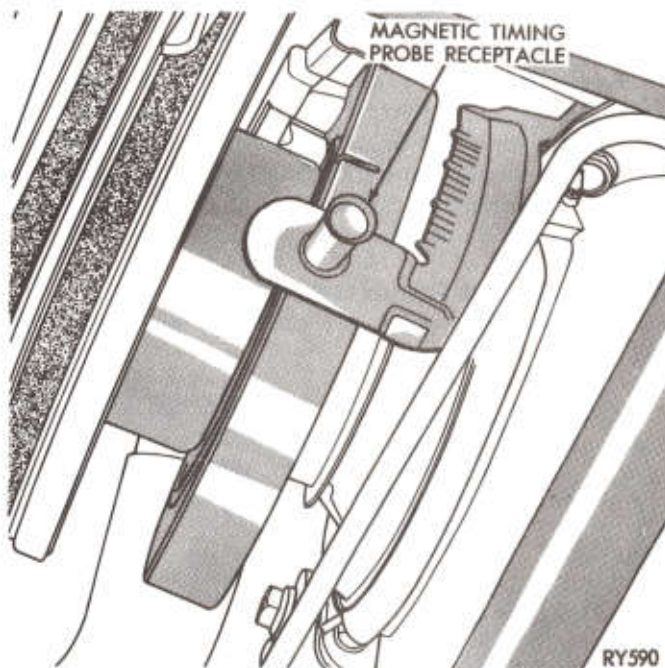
Bottom Mounted Magnetic Timing Probe Receptacle 8 Cylinder Engine
